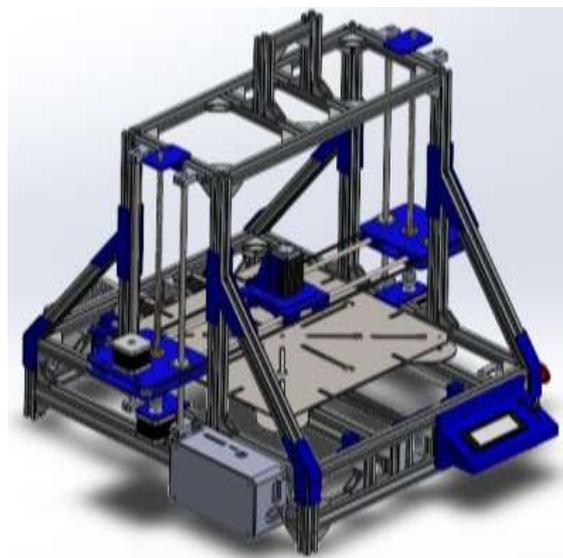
Cad Model Of The Multi-Purpose Machine.
